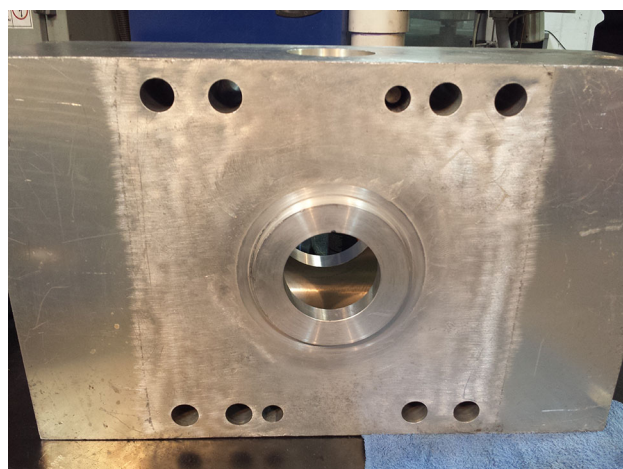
Photo of the pre-machined aluminum actuator before preparation for cold spray
